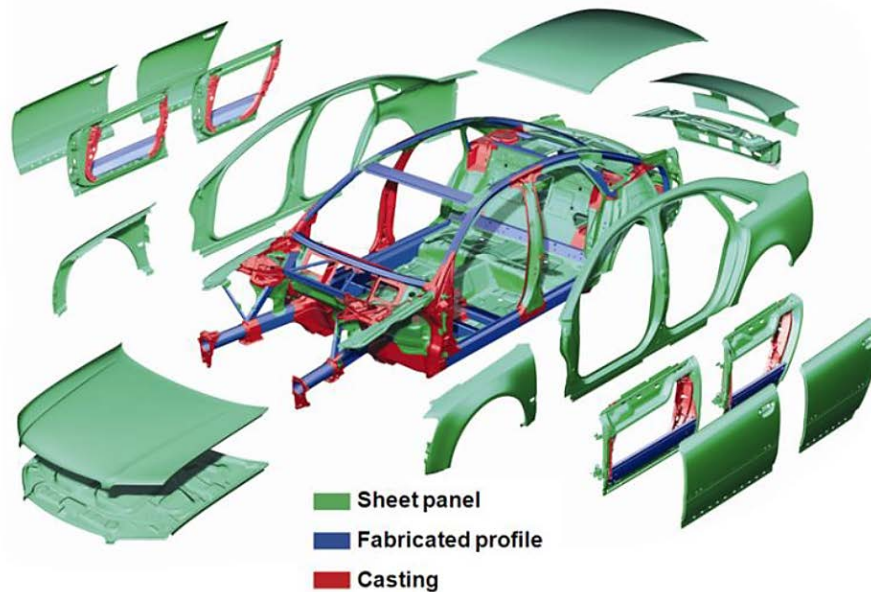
Exploded view of the aluminium body structure of the Audi A8 [16]
